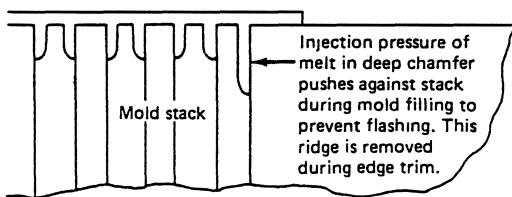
Built-in "melt piston" compresses mold cavity.
